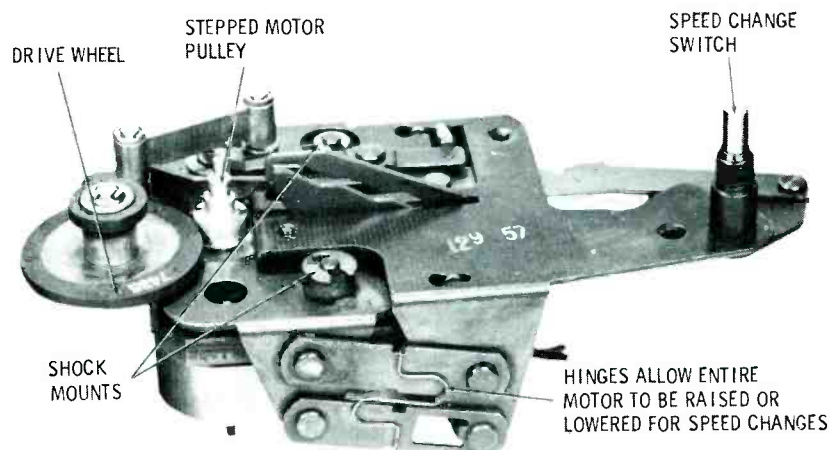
Motor assembly of V-M has stepped motor pulley and rubber drive wheels.
